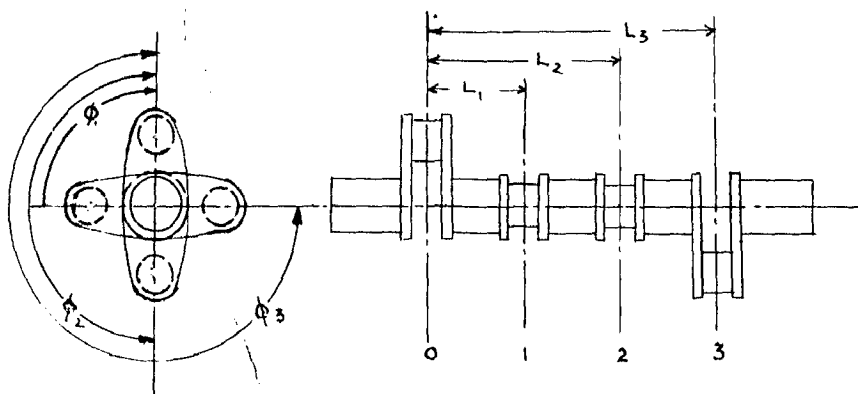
Positions of Cranks on the Crank Shaft of a Multi-cylinder Engine (Crede 1959)
